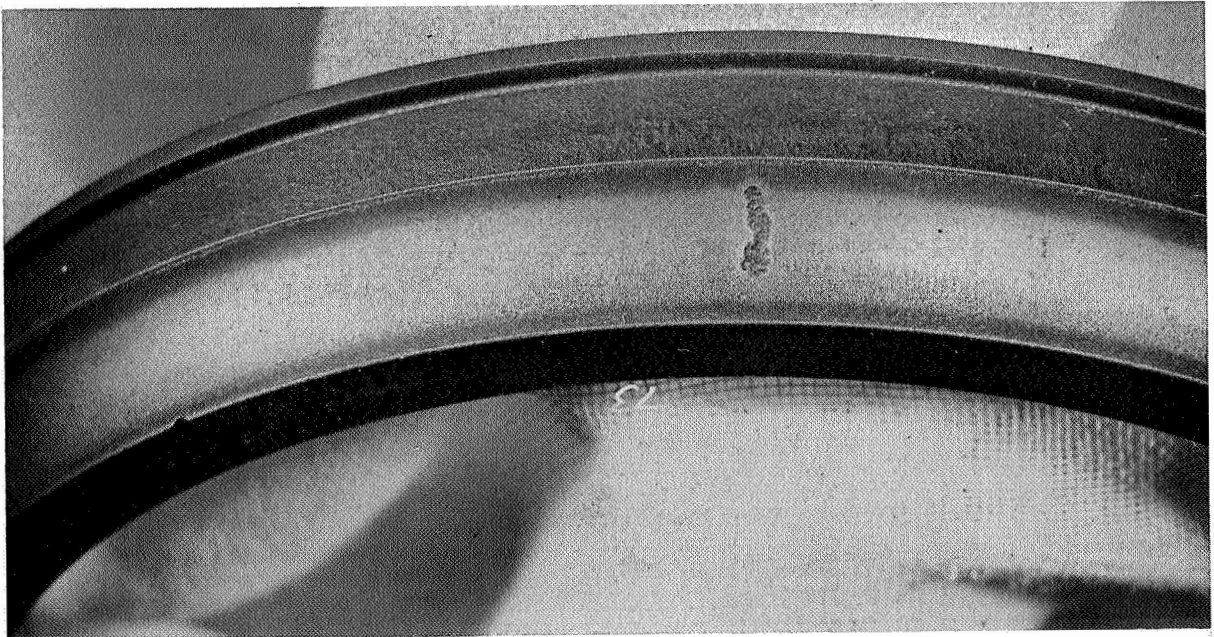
BEARING S/N 73. FATIGUE FAILURE ON OUTER RING.
